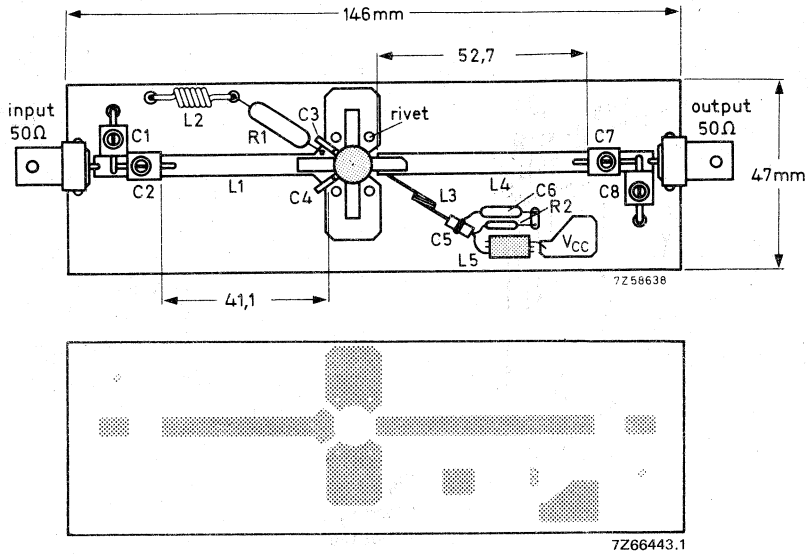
Component layout and printed-circuit board for 470 MHz test circuit.
